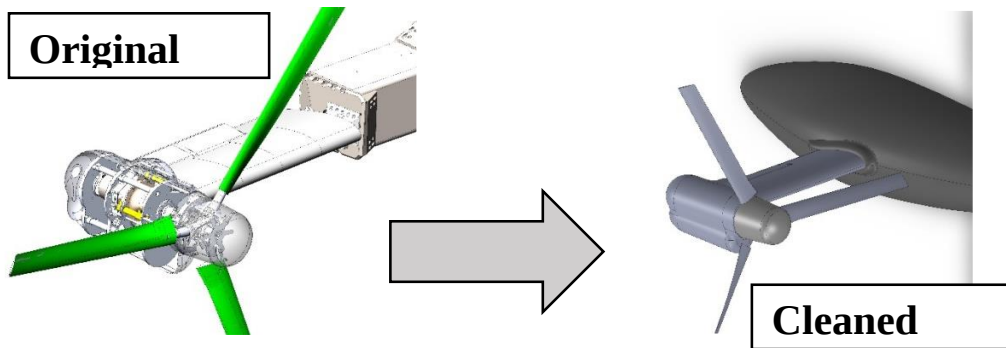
Original CAD vs. cleaned CAD. The original CAD involves many small parts that are removed or combined in the cleaned CAD.
